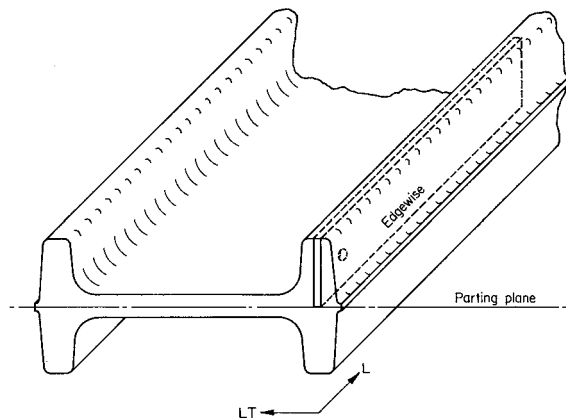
(b). Bearing specimen orientation for web-flange type die forging.
